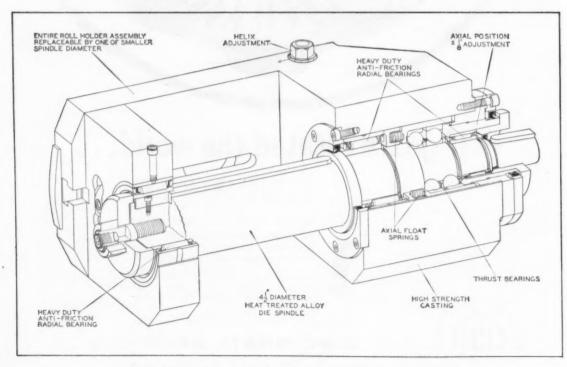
Cutaway view of spindle of Landis thread-rolling machine, Fig. 1.
